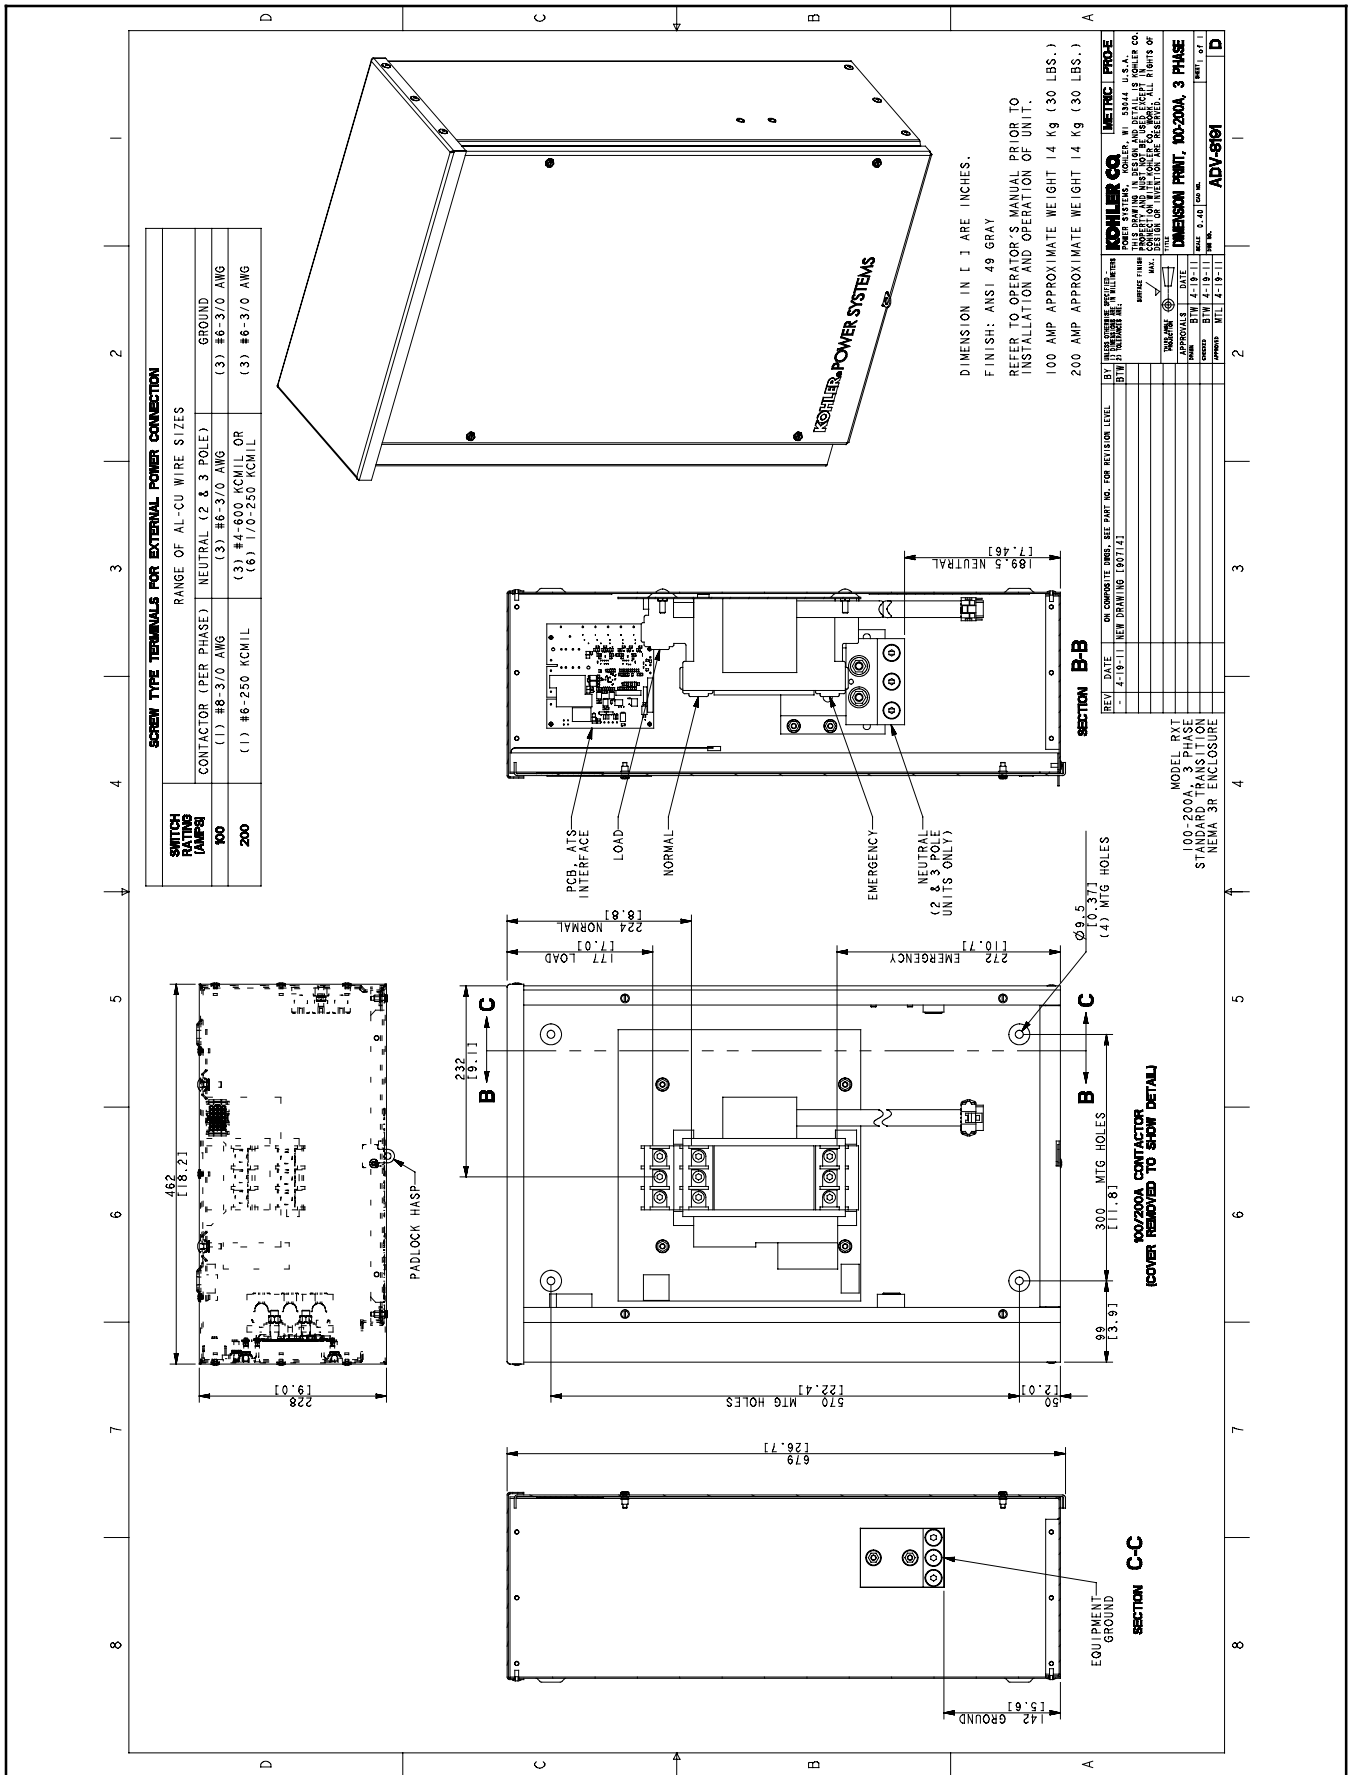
Enclosure Dimensions, 100-200 Amp Three-Phase, 3- and 4-Pole, ADV-8191
